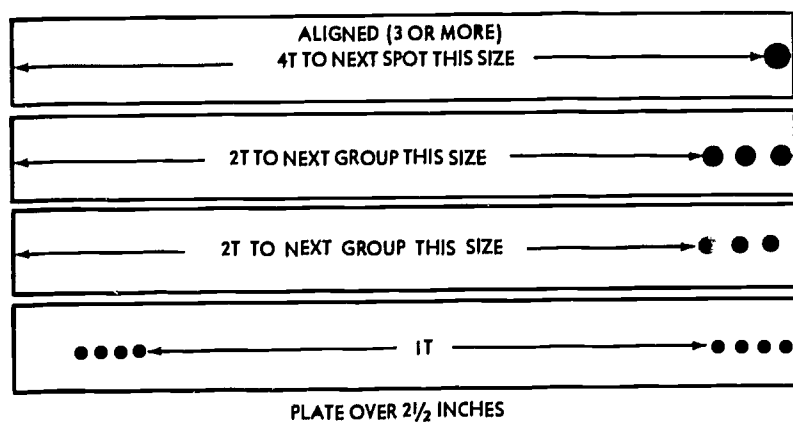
ASME Porosity Charts Showing Maximum Permissible Porosity in Welds. (Cont.)
